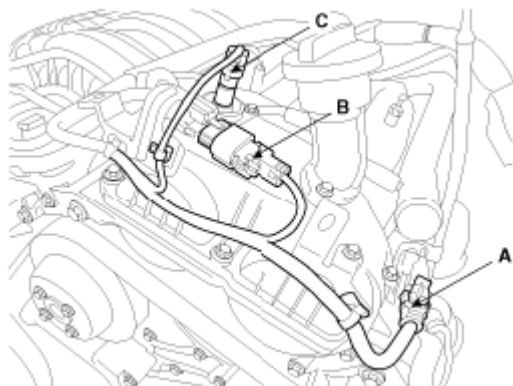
Identifying Connectors For LH Knock Sensor, LH/RH Intake OCV, & LH Exhaust OCV
